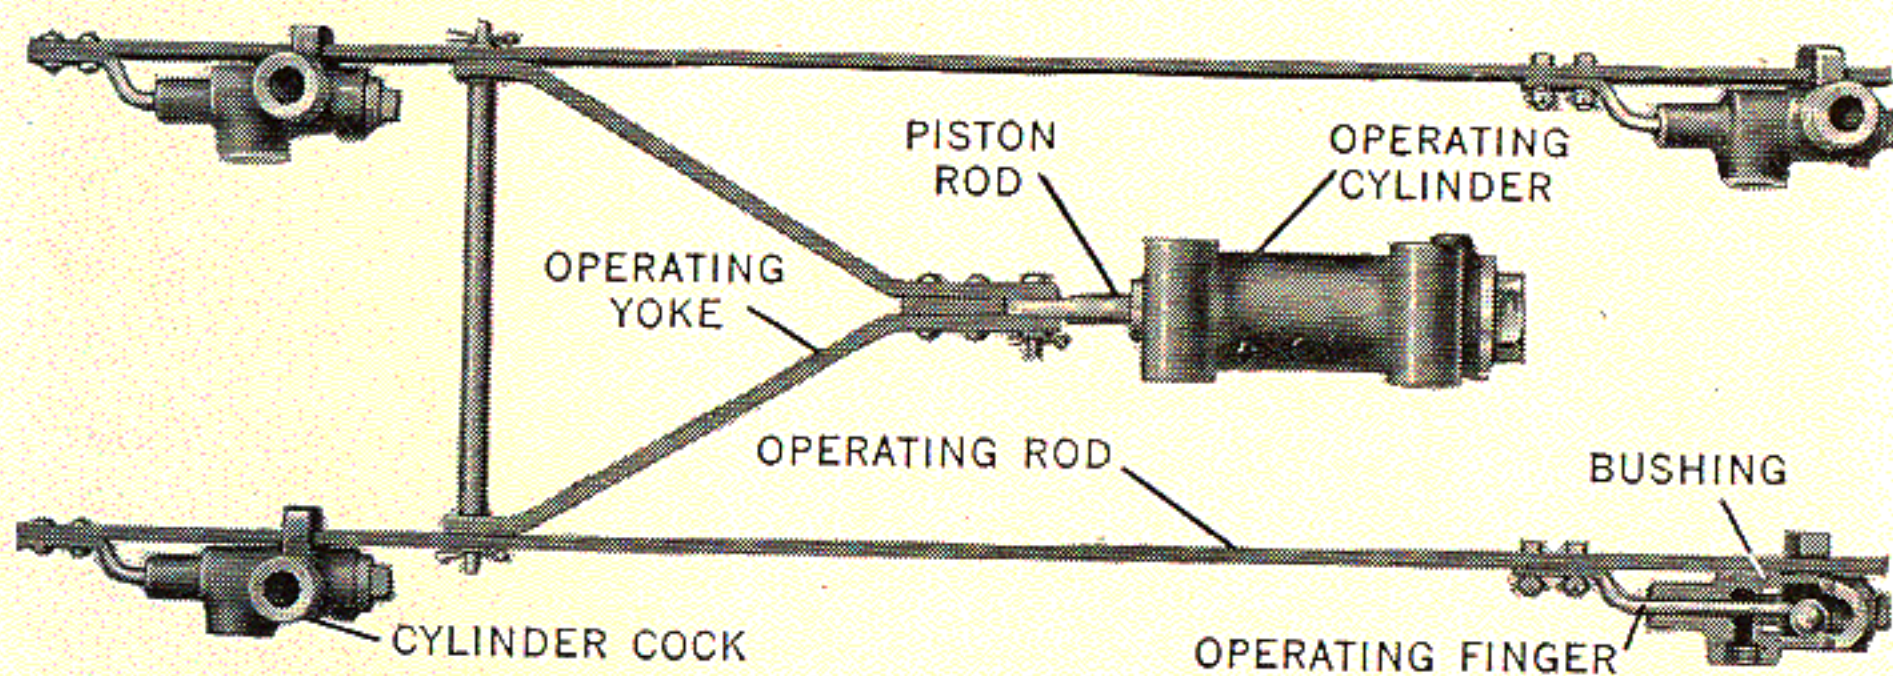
Type C-1 Booster Cylinder Cock Operating Arrangement
